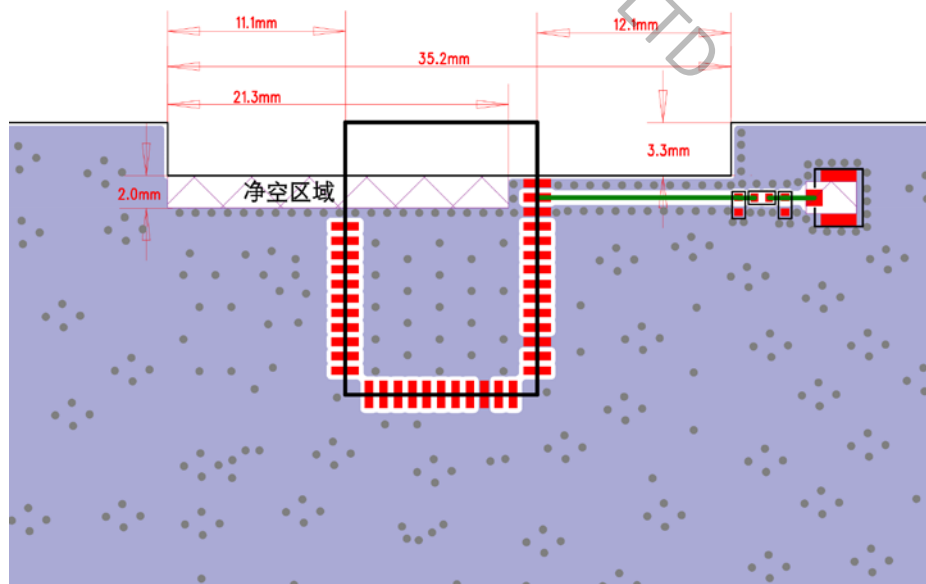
Module Layout - Baseboard TOP Layer
